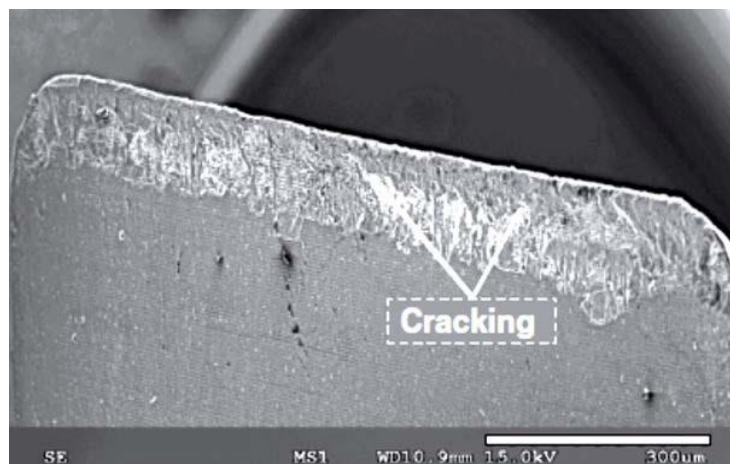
1 Cracks at cutting edge after machining Ti-555 alloy on a heavy-duty lathe machine (76)
